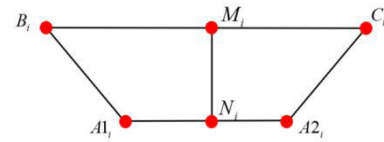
Multi-layer single-pass weld path calculation.
